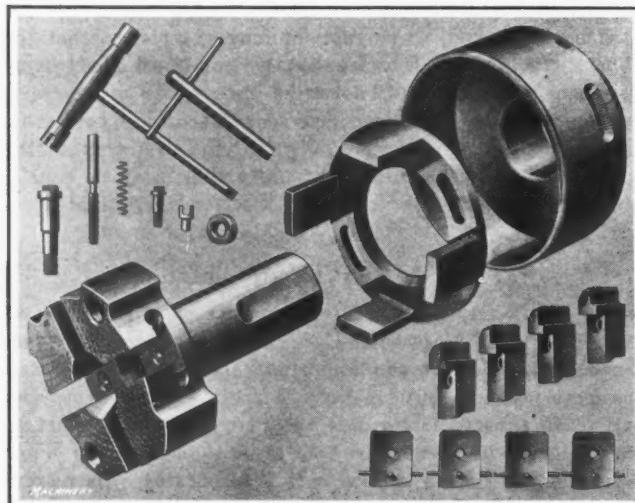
Die-head shown in Fig. 28, dismantled to show Construction
